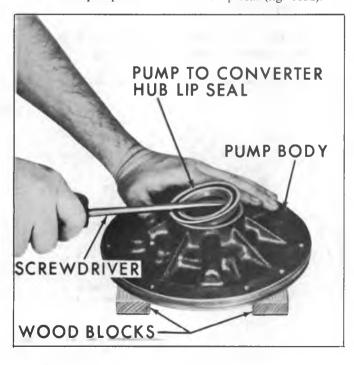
M-Removing Pump to Converter Hub Lip Seal
